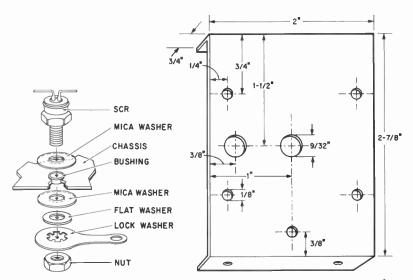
Detail diagrams showing how SCRs are mounted and dimensions for heat-sink chassis.
